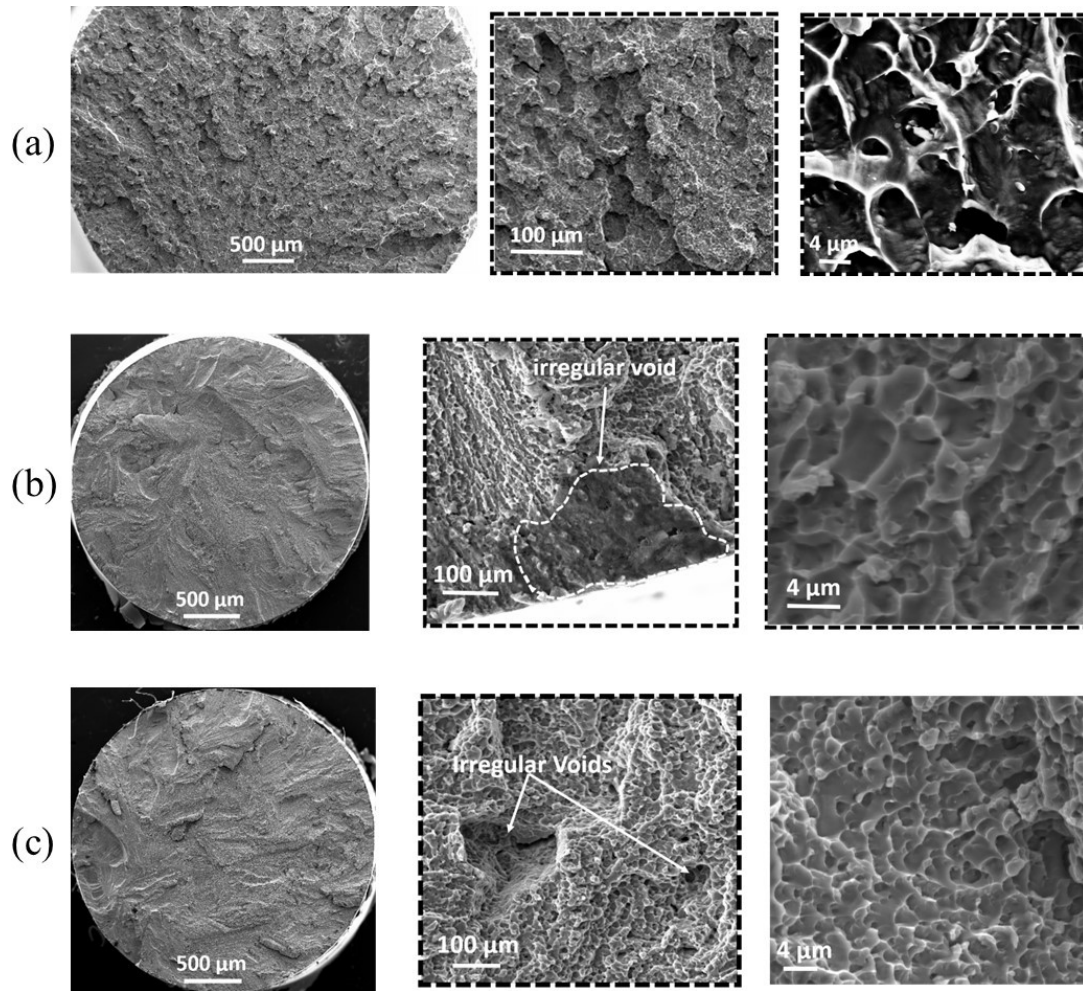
Fracture surfaces of tensile specimens for: (a) wrought, (b) AM HT1, and (c) AM HT2 exhibiting dimples as evidence of ductile fracture. Presence of larger and deeper dimples on the fracture surface of the wrought specimens may have contributed to the larger elongation to failure and ductility of wrought specimens.
